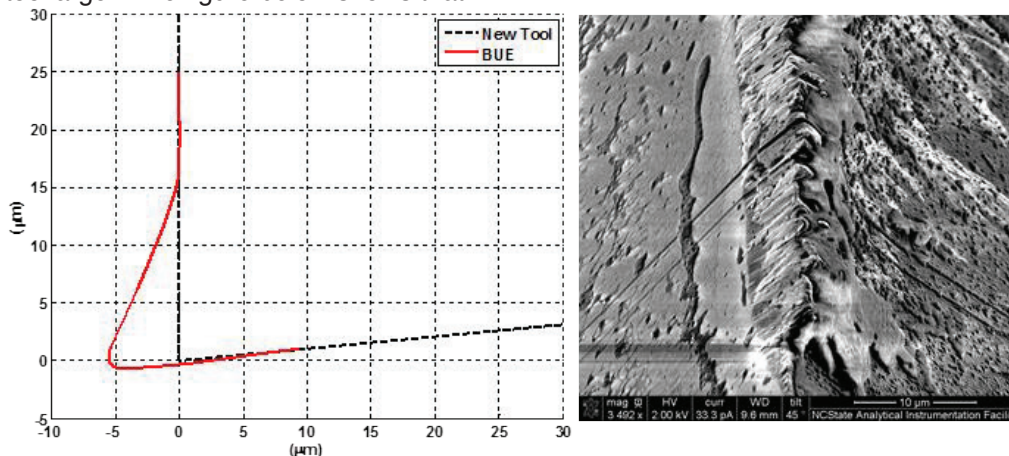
EBID measurement of BUE near the end of the tool-workpiece contact region.
